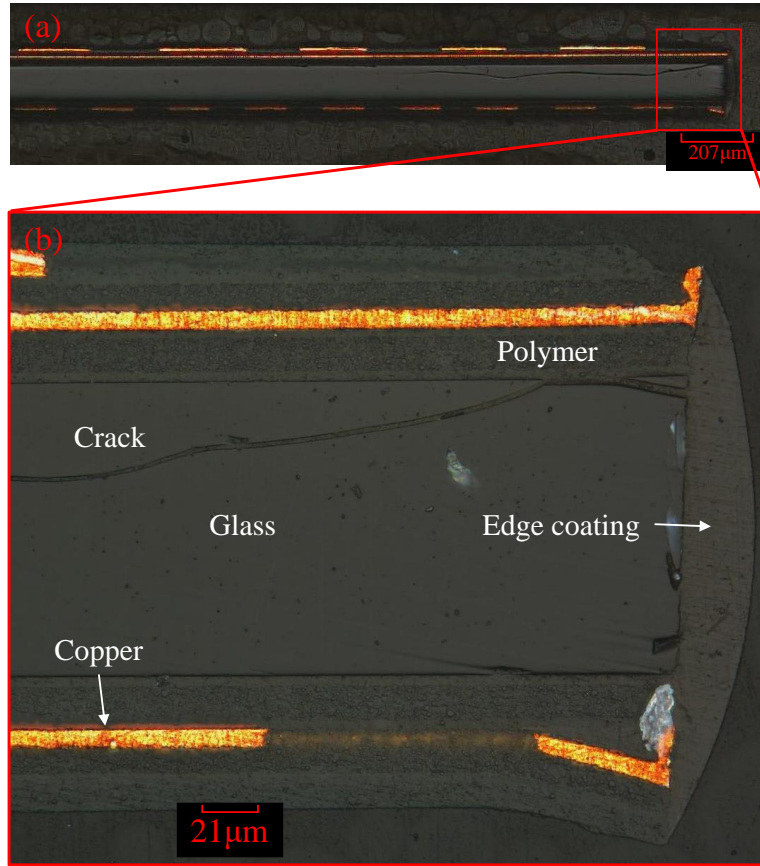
Cross section of edge coated sample which had a crack before edge coating was applied.
